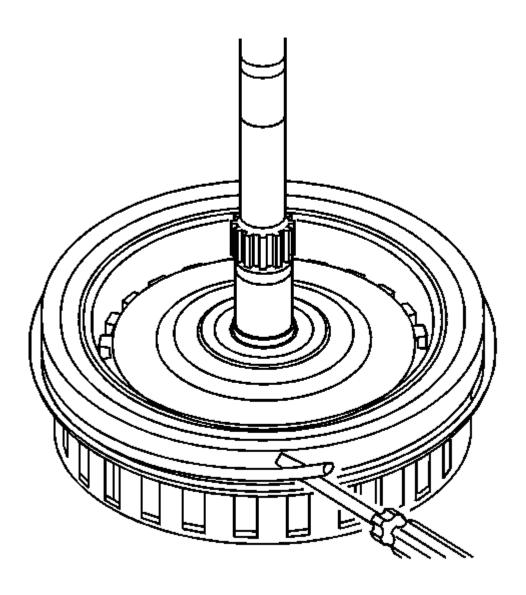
View Of 3-5 Reverse Clutch Piston & Components Courtesy of GENERAL MOTORS CORP.
